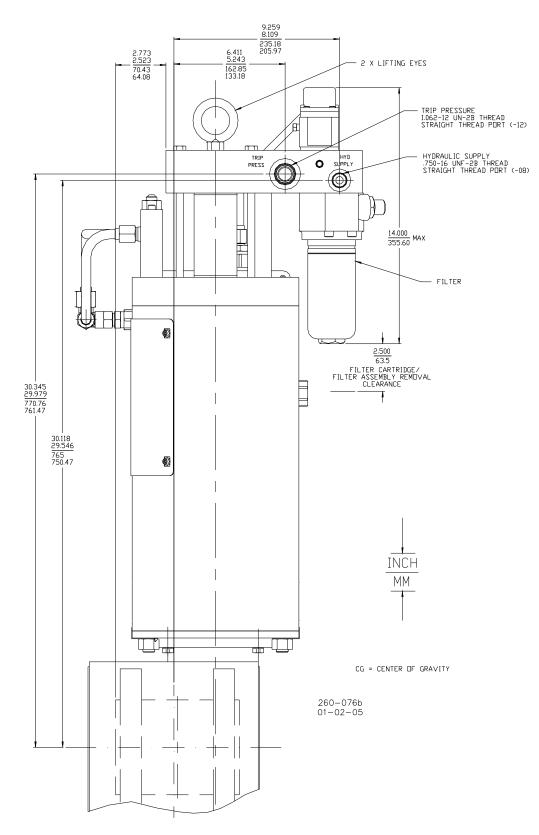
Gas Stop/Ratio Valve Outline Drawing (3-inch)
